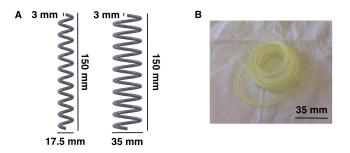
(A) Design of springs with different dimensions; (B) Soft printed spring of dimensions $150 \times 35 \times 3mm$
